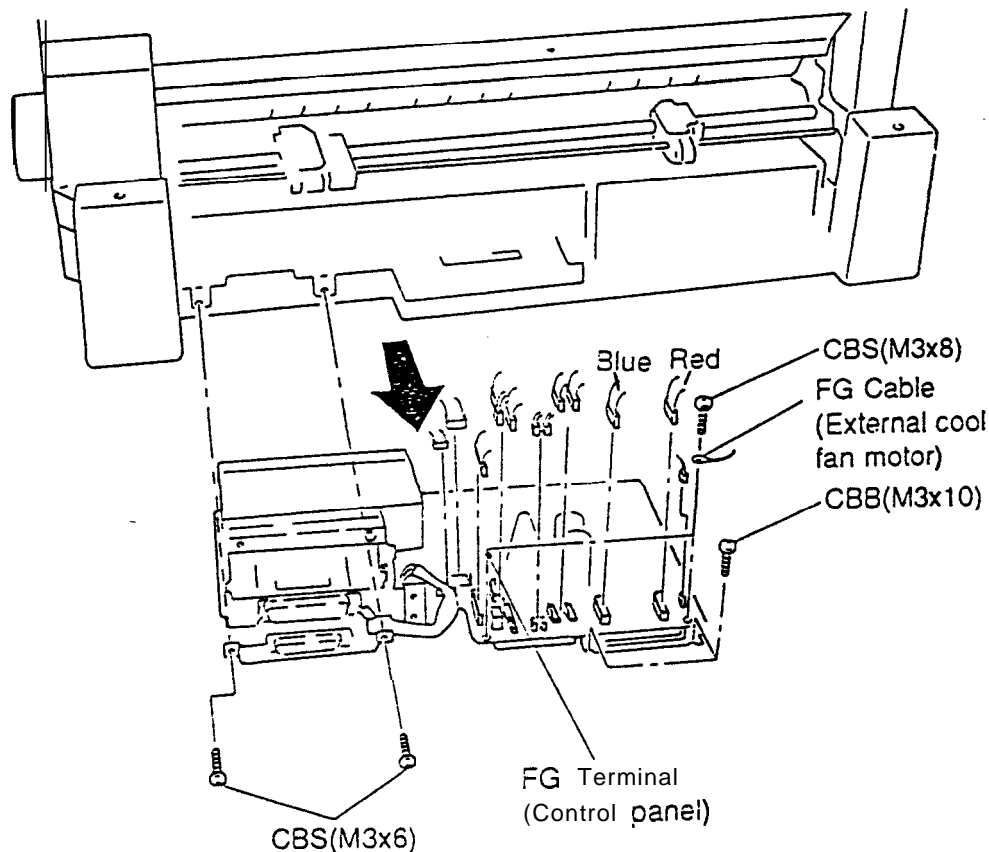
Removing the BOARD ASSY., MAIN & SUB
